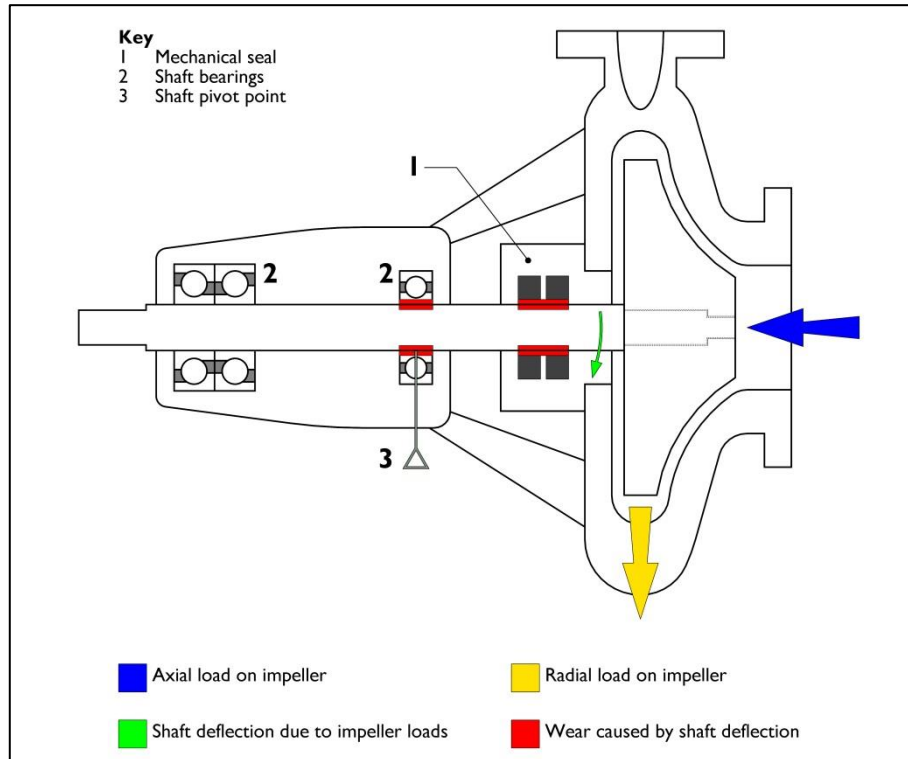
Centrifugal pump showing axial and radial loads, deflection and wear on bearings
